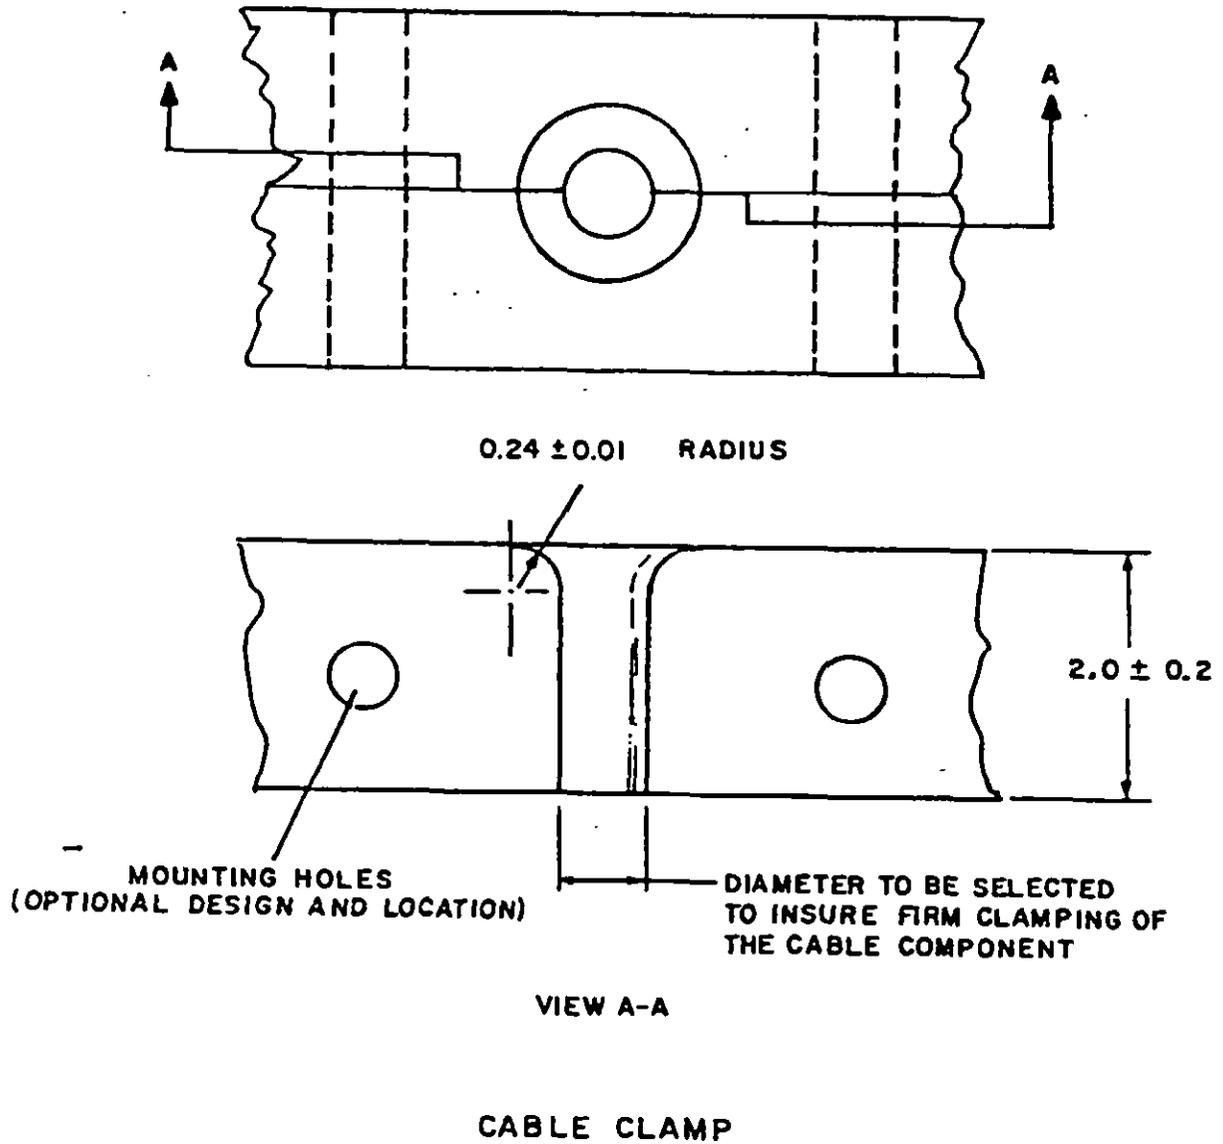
Flexure test fixture clamp (4.7.15.2).
